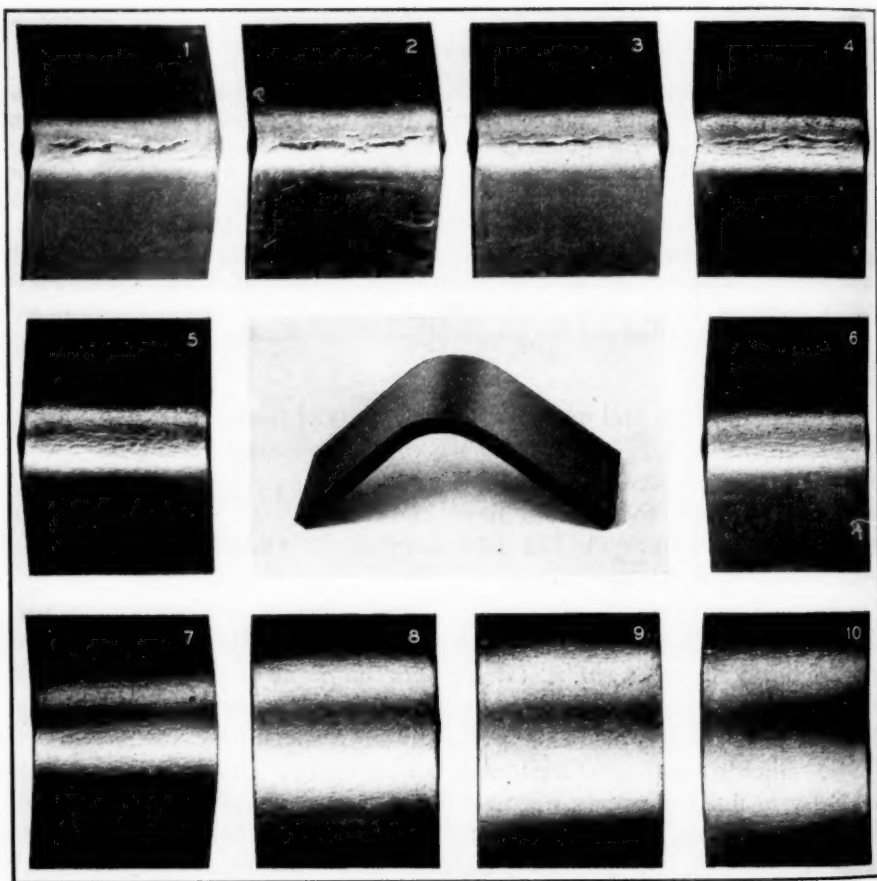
Sections of Formed Specimens (Insert—Satisfactorily Formed Specimen).
